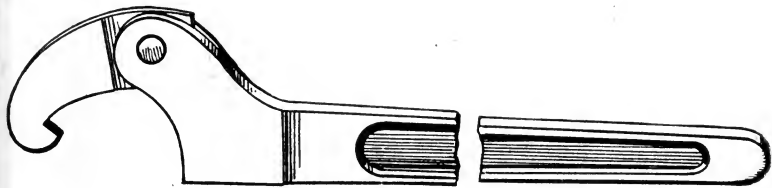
,283.—Adjustable spanner wrench. This type of wrench is especially useful around pumps or engines having different sizes of screw cap stuffing boxes. The movable jaw is adjustable from one size to another with one hand and without releasing the grip on the handle.
